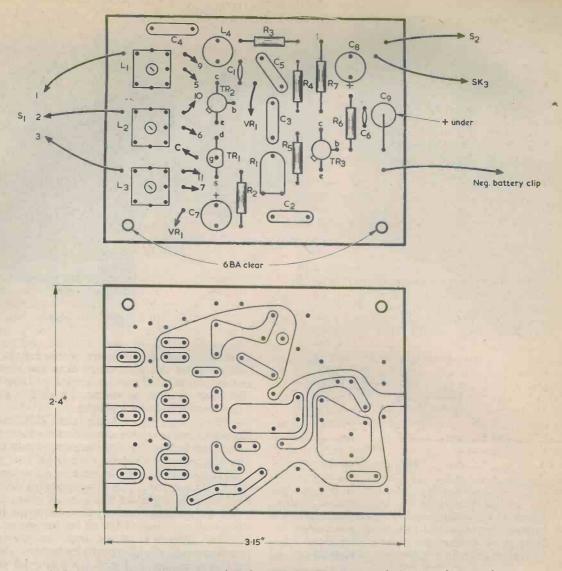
The printed circuit board, reproduced actual size. The letter and number references indicate connections to the front panel components shown in Fig. 4
